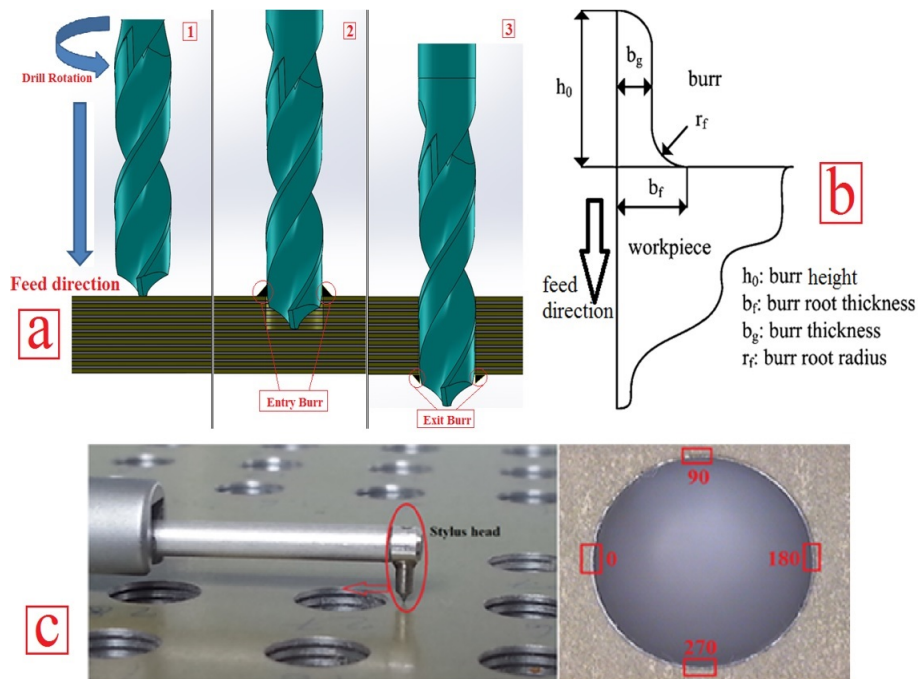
Burr profile showing a) the formation of burrs during drilling process b) detailed description of burr parameters [317] c) the measurement process and locations of burr height and burr root thickness s [303]
